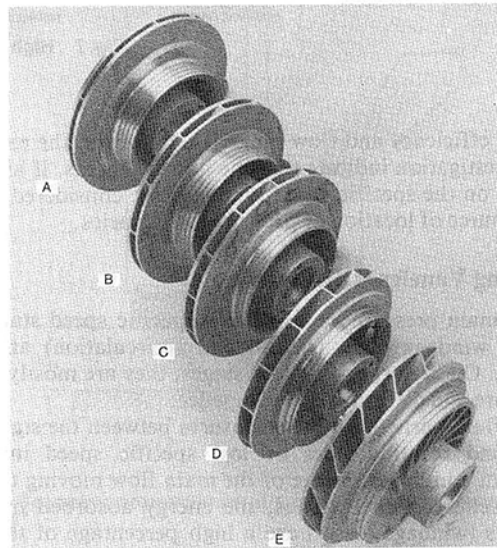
Impellers of a 7-in. dia Solar compressor family
